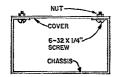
W9NFO's method of attaching a cover plate to a chassis. Each machine screw is held in place by a threaded hole in the chassis lip.
